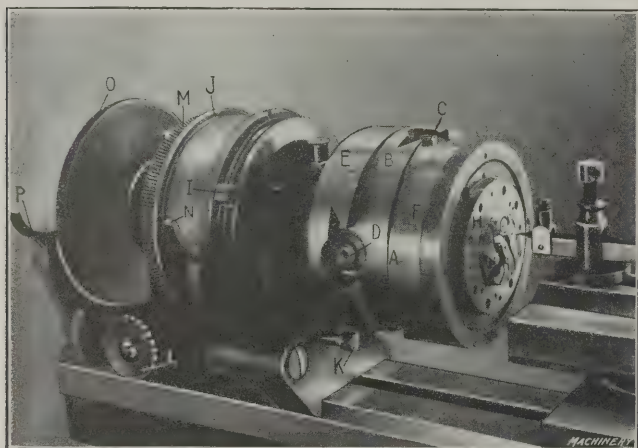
Transfer Chuck used in making Master Plates and Model Watch
